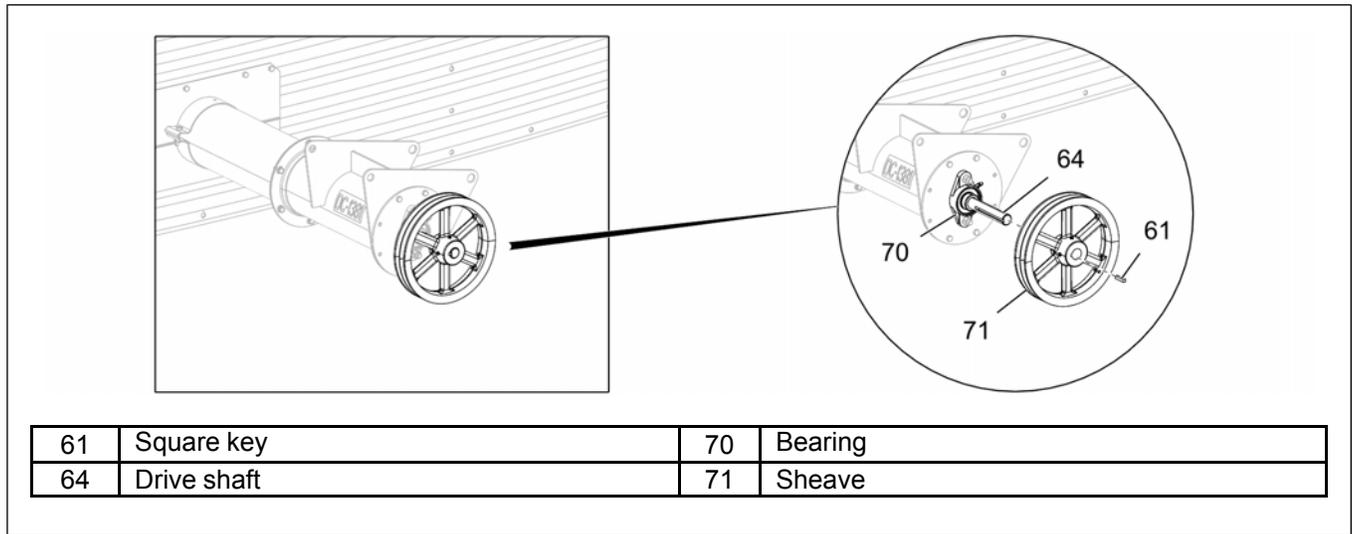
Assembling the bearing and bearing plate to the drive head tube
